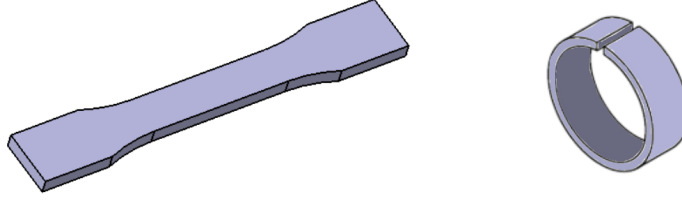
3D drawings of the tensile specimen and the split ring.
